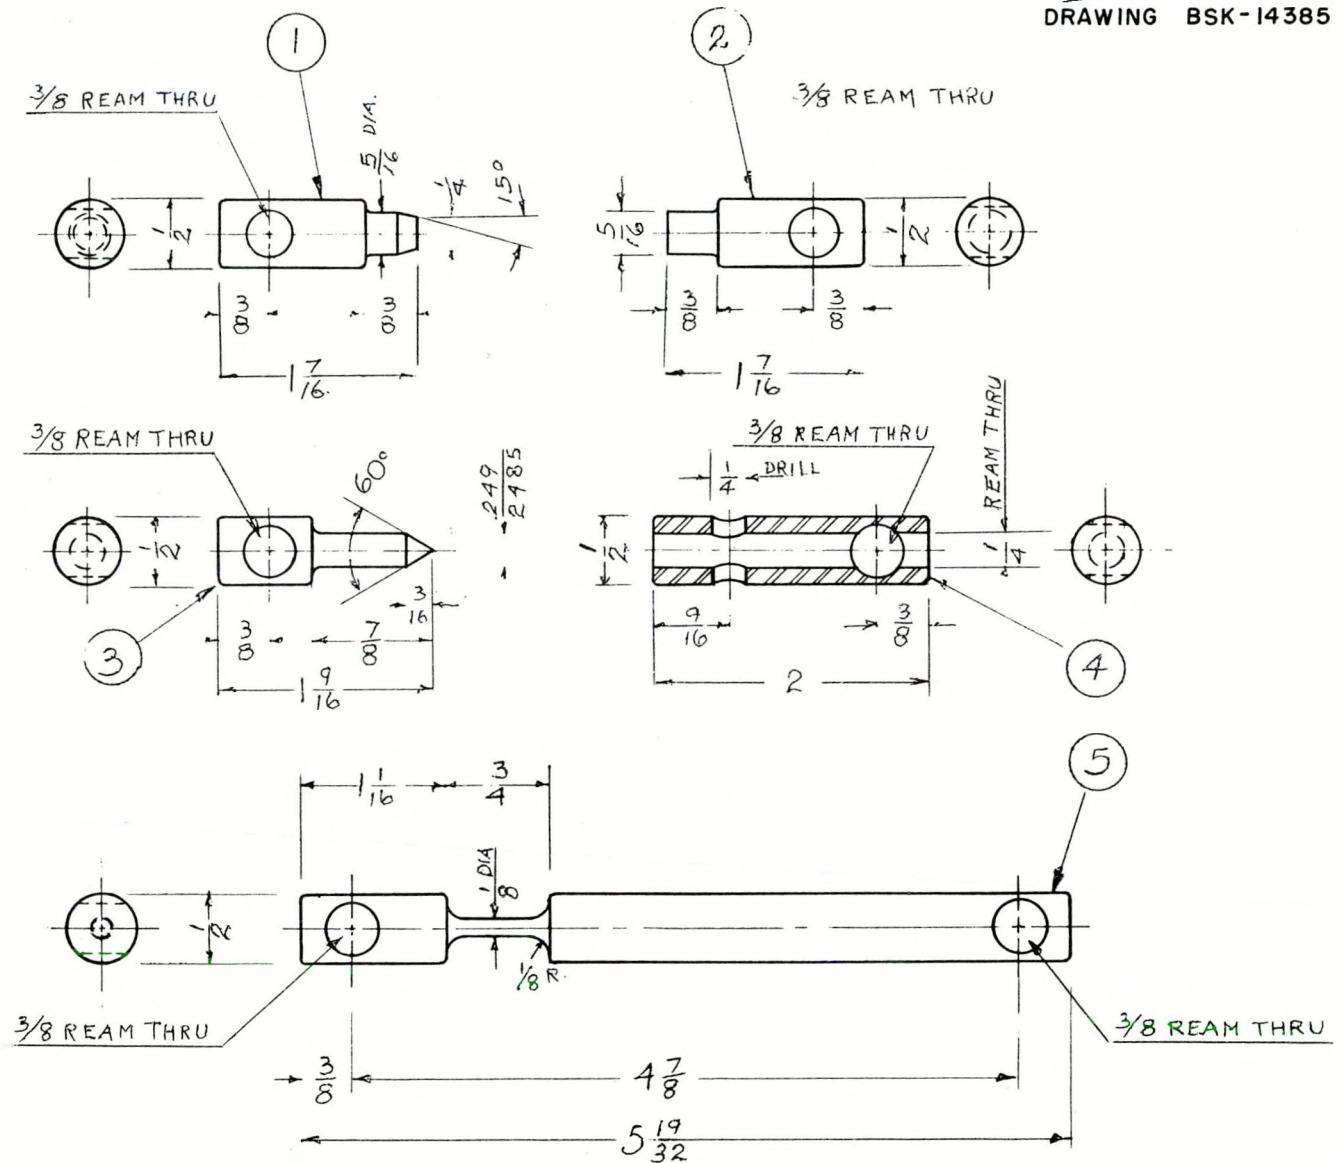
DETAILS OF PARTS TO BE TESTED IN "FIGURE 8" TEST SECTION
